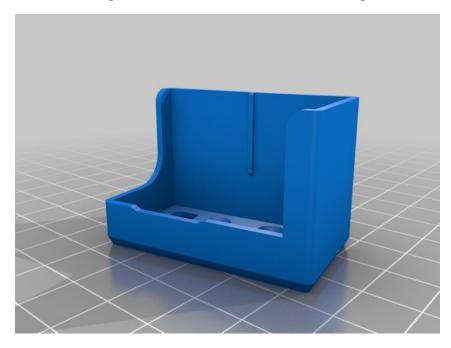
Camera Fixing Mount (Courtesy: www.thingiverse.com/thing:1247236)
